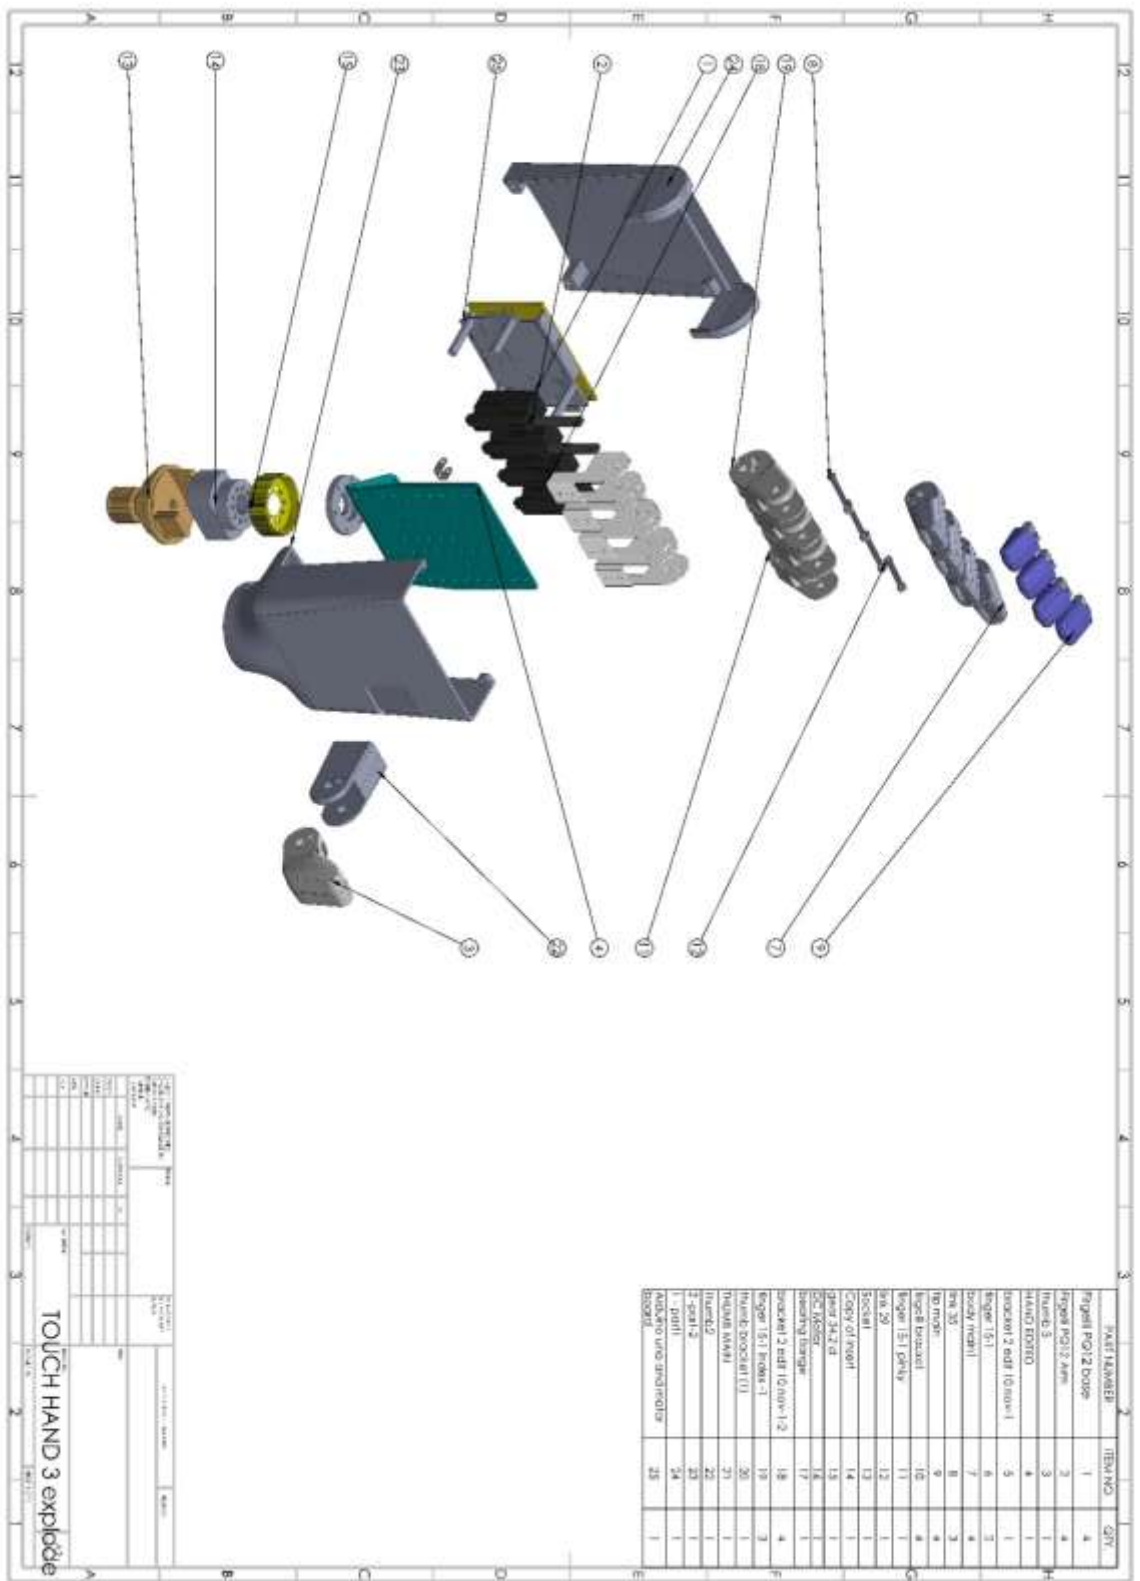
Touch hand 3-mechatronic exploded drawing.
